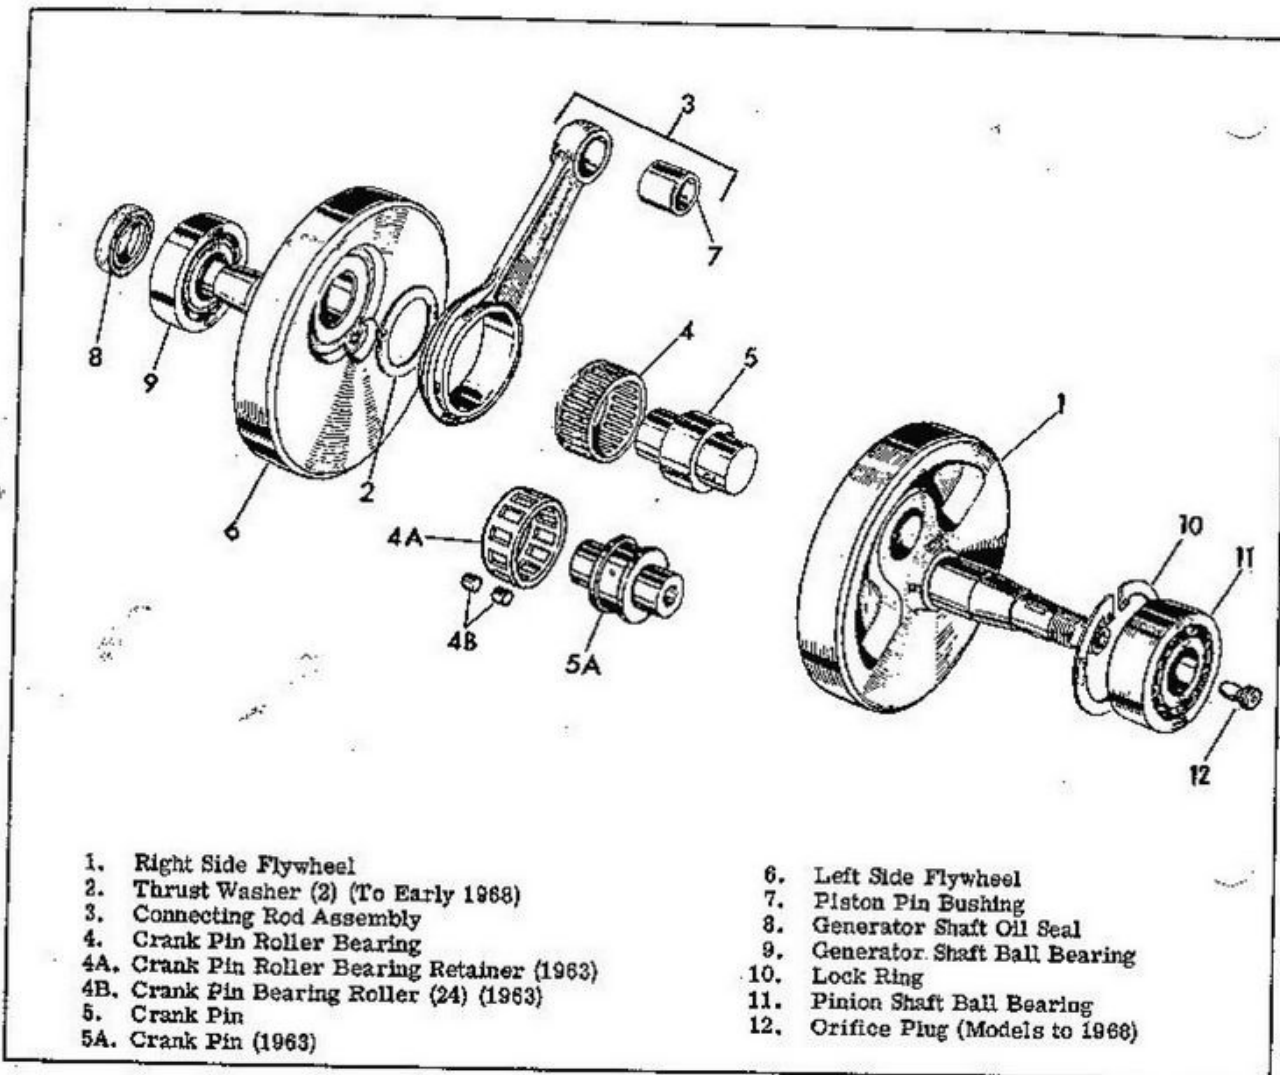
E-80. Flywheel and Connecting Rod Assembly - Exploded View
